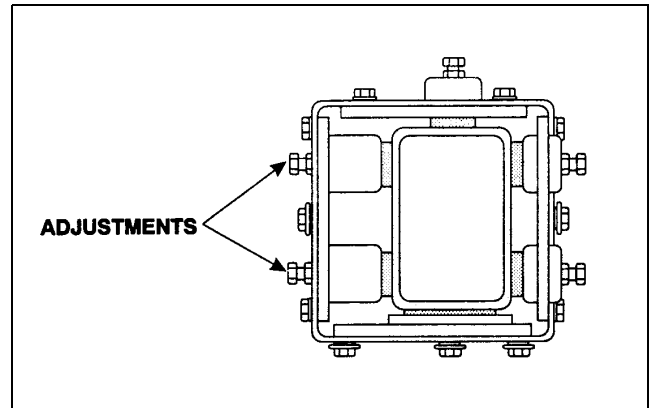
Location of Components - Front Base Boom Wear Pad Adjustments.
